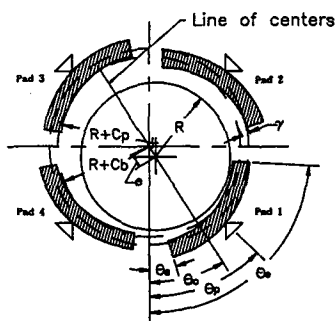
Geometry of air-lubricated tilting pad journal bearing
